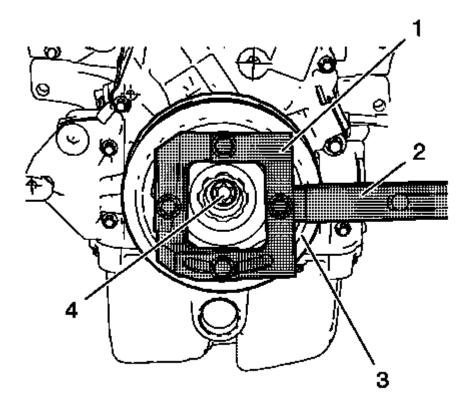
Engine Front Cover And Crankshaft Balancer Courtesy of GENERAL MOTORS COMPANY
